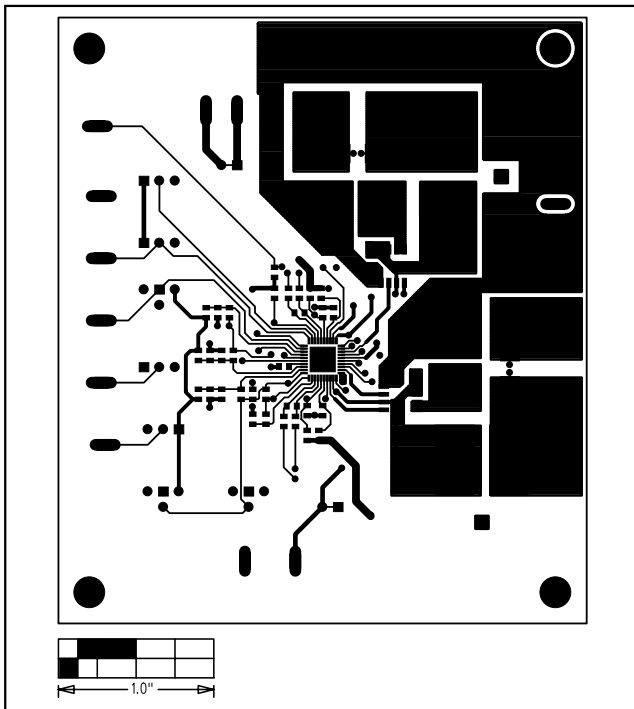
MAX1541 EV Kit PC Board Layout—Component Side
